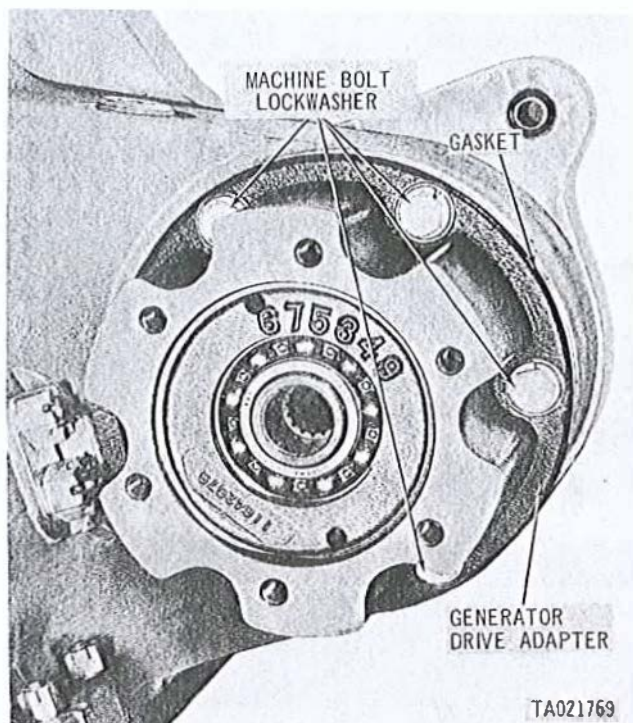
Removing or installing generator drive gear adapter and associated parts, model AVDS-1790-2C engine.
